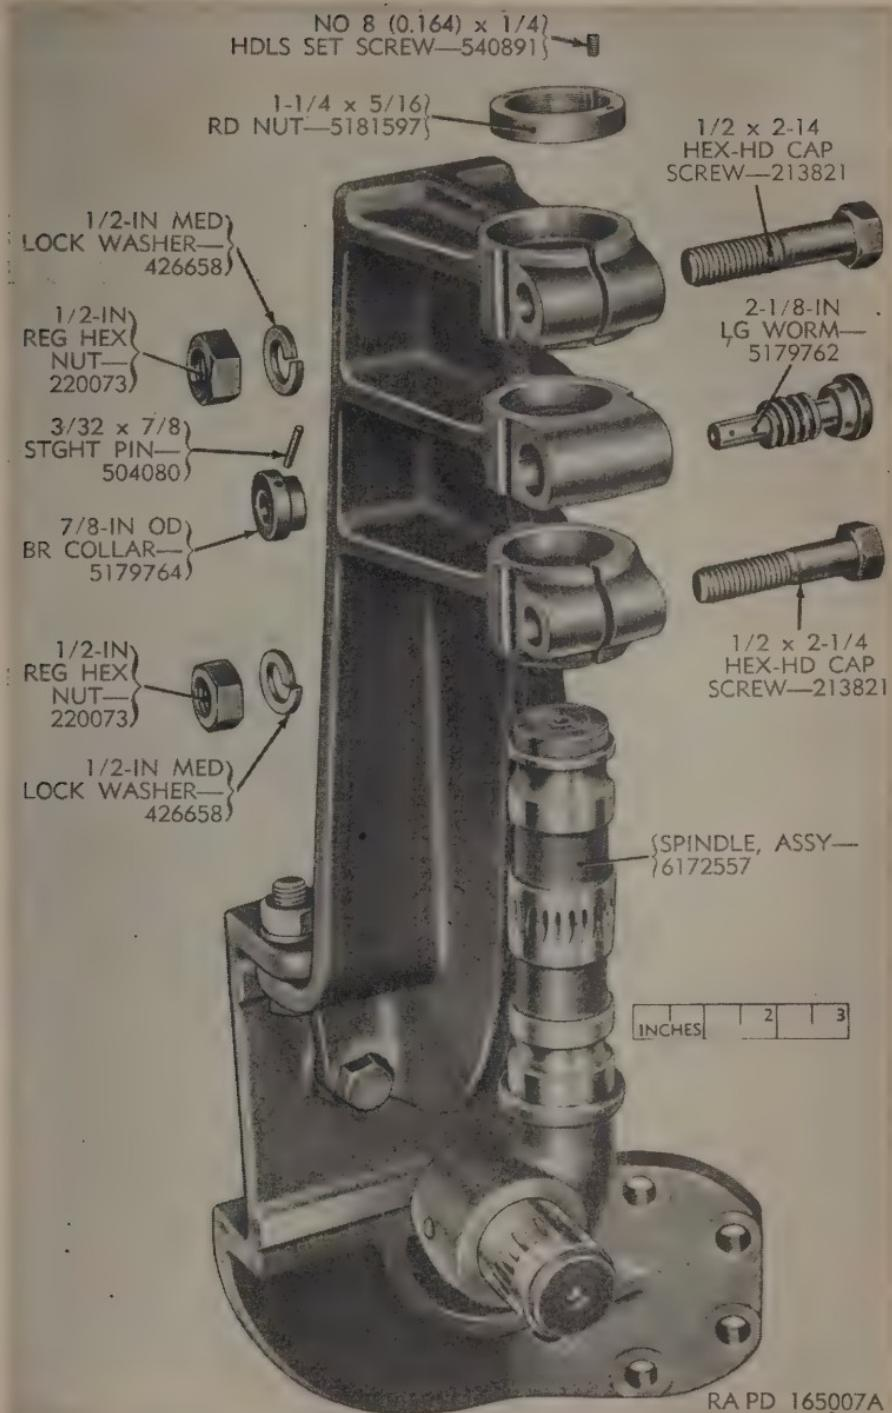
Telescope mount M28—removal of the spindle assembly—exploded view.
